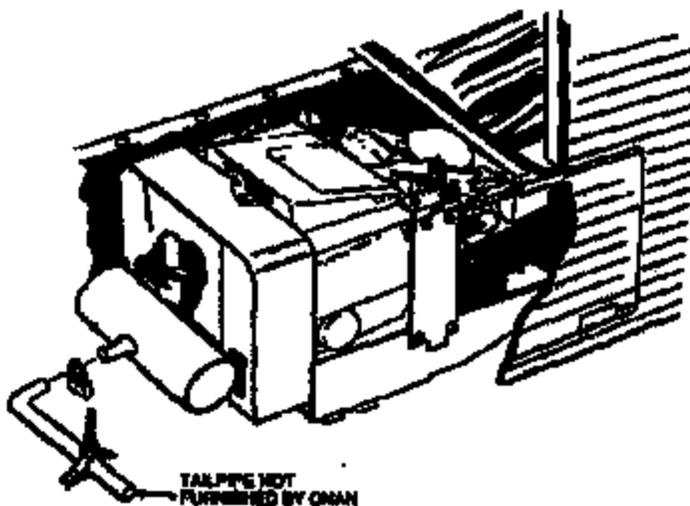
EXHAUST SYSTEM KIT EXAMPLES FOR UNDER-FLOOR MOUNT GENSETS
